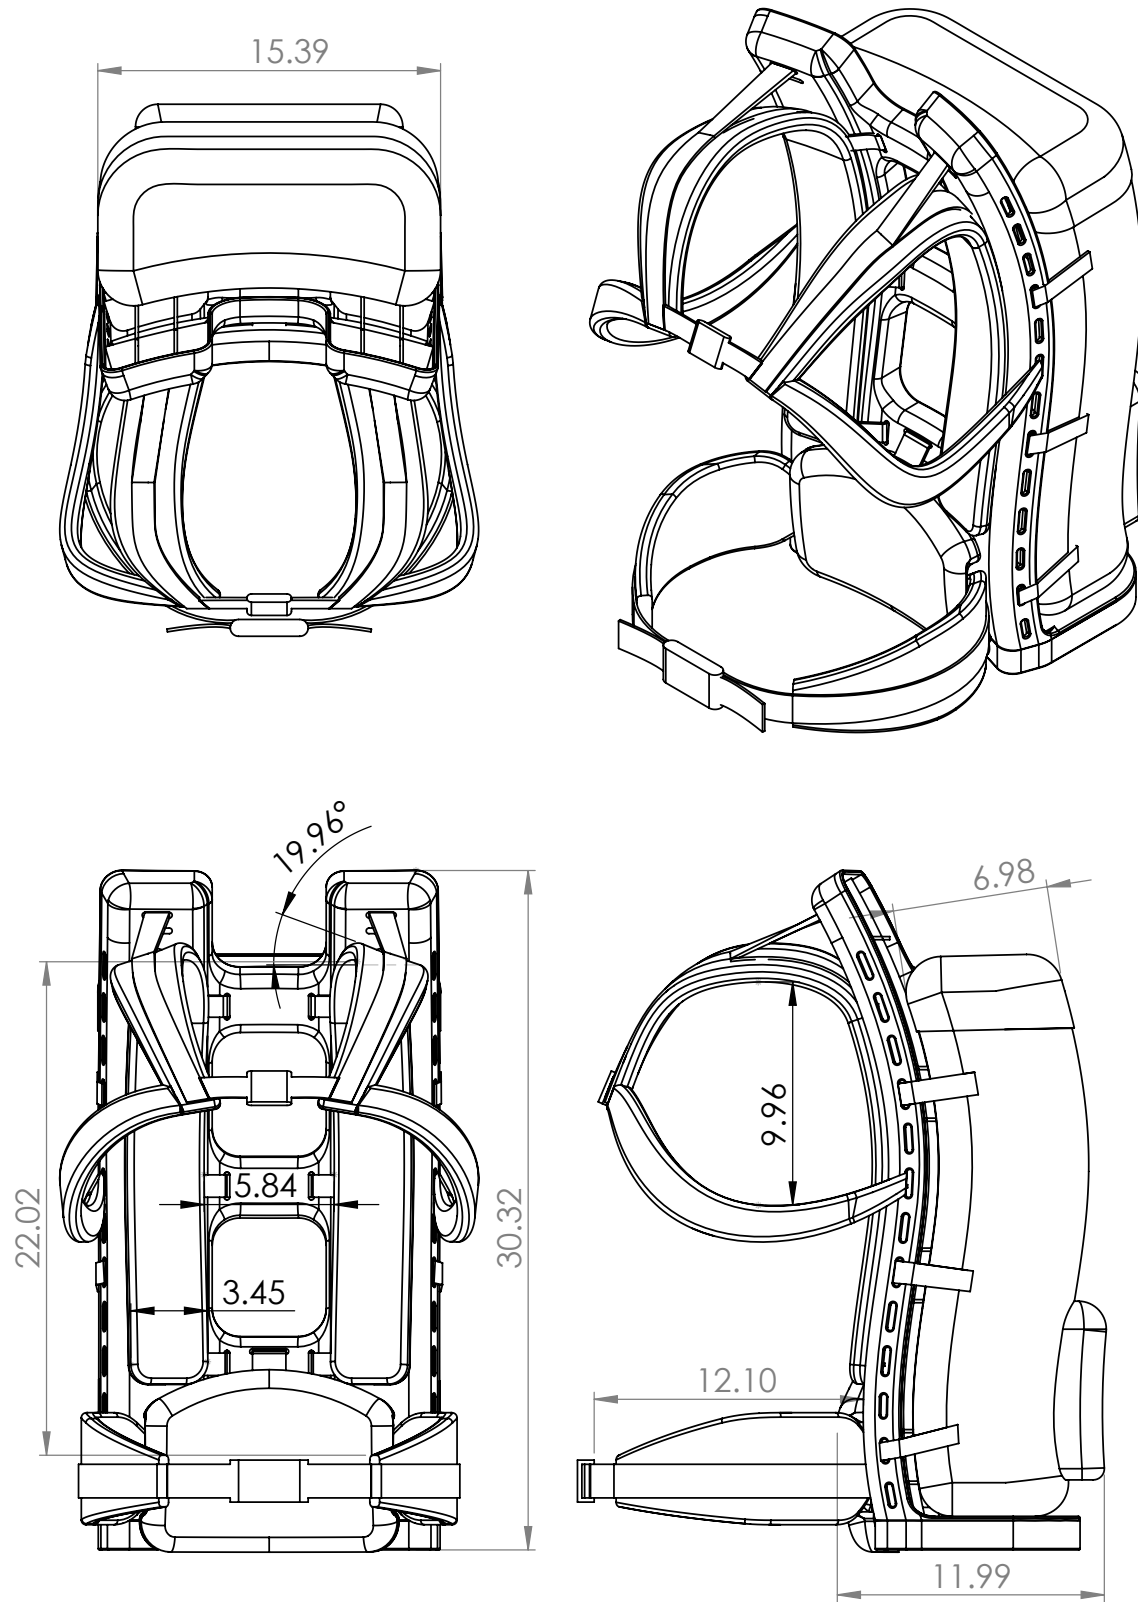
Crossover Technical Drawings: Rough measurements in inches
